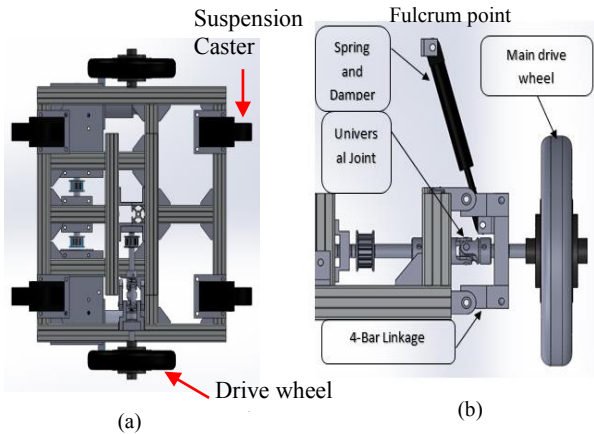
Bottom view of robot platform consist of 4 spring and damping casters and 2 main drive wheel and suspension system (left). The suspension system for main drive wheel (right).
